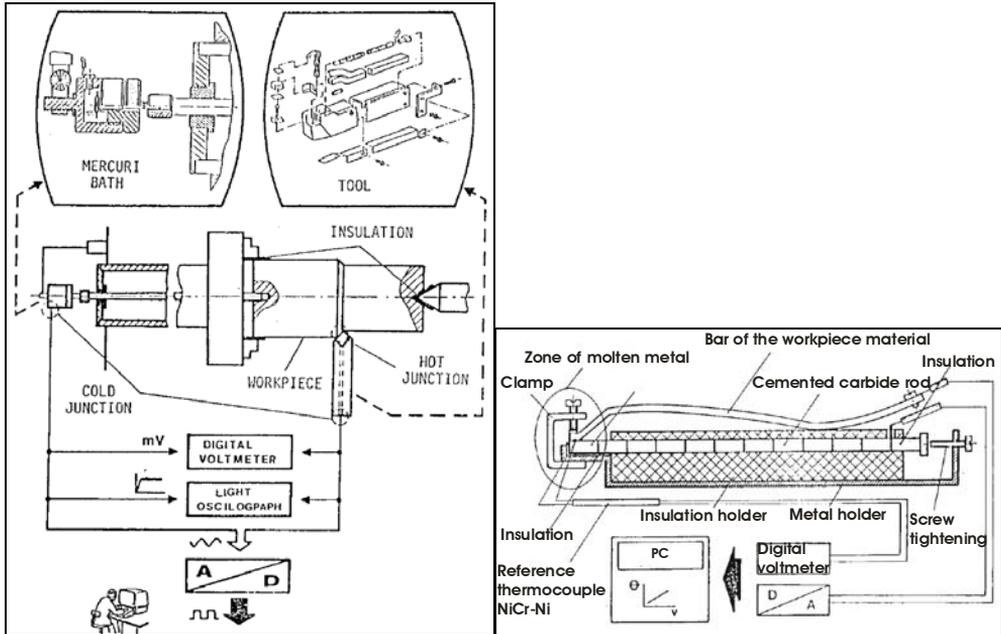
Experimental setup for a) measuring average chip-tool interface temperature, b) calibrating the tool-work thermocouple [3]
